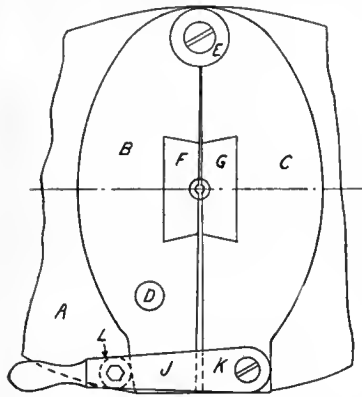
PUNCH AND DIE FOR SPLITTING END OF EJECTOR ROD
